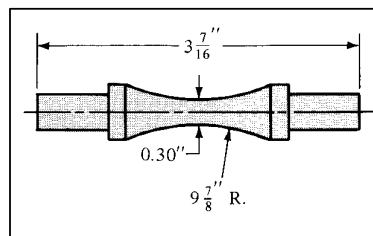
Test Specimen Geometry for the R. R. Moore Machine¹⁶
